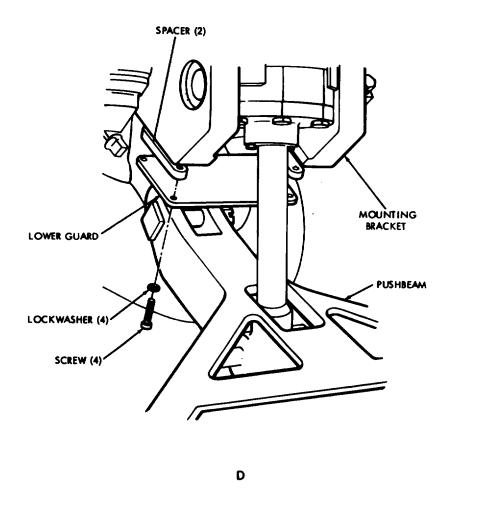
Removal or installation of cylinder guards (sheet 2 of 2).
